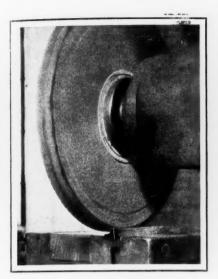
Grinding a Formed Tool with a Formed Wheel
